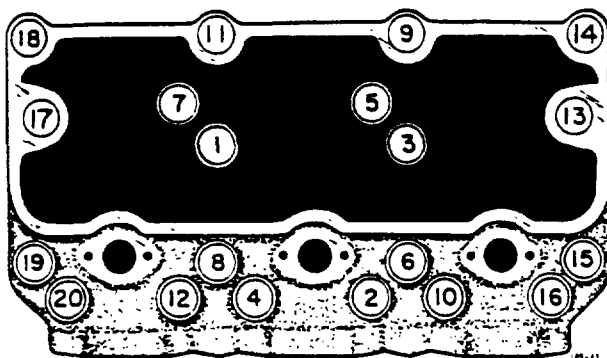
Cylinder Head Stud Nut Tightening Sequence
